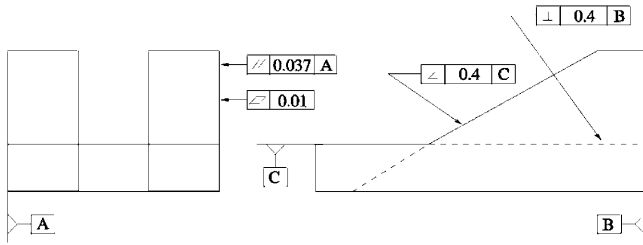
Specification of geometrical tolerances for a part.
